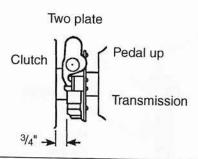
Two-plate clutch release bearing clearance on angle-spring clutches without a clutch brake. The ¾-inch specification is used on synchronized transmissions only. On a nonsynchronized transmission, the specification is ½ inch. Courtesy of Eaton Corp.—Eaton Clutch Div.)
